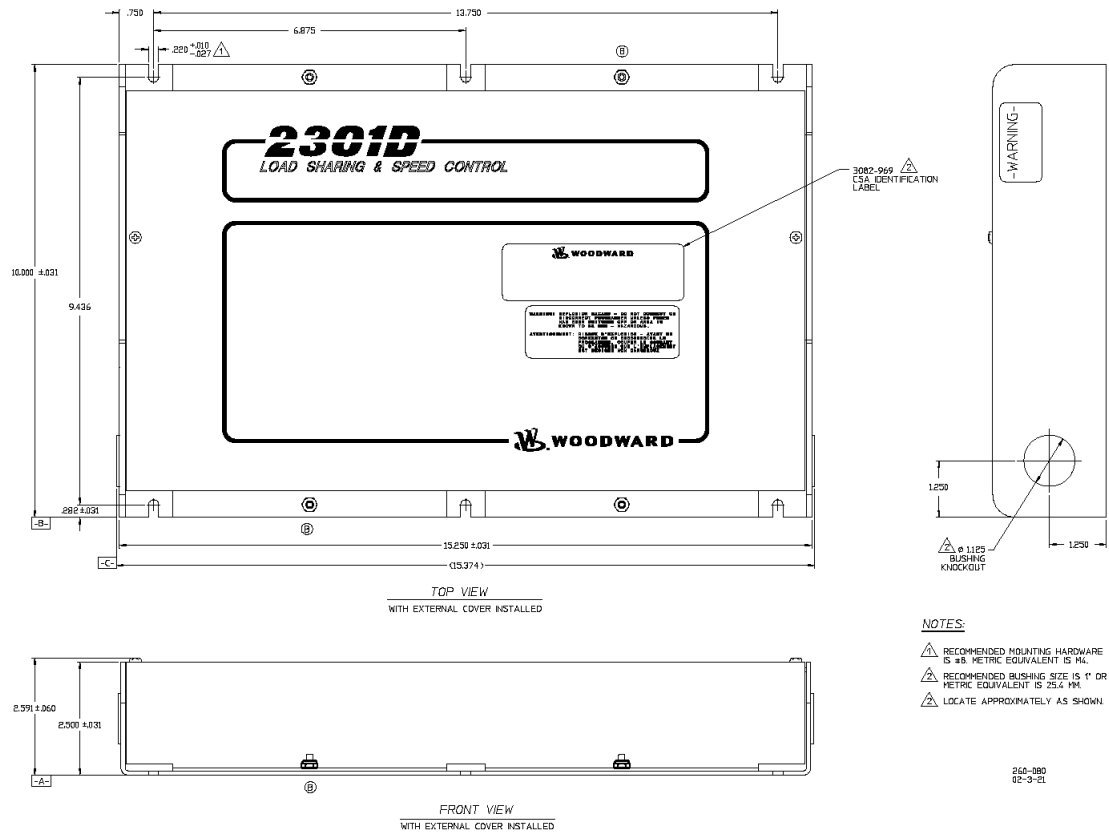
2301D Outline Drawing (Hazardous Locations)
